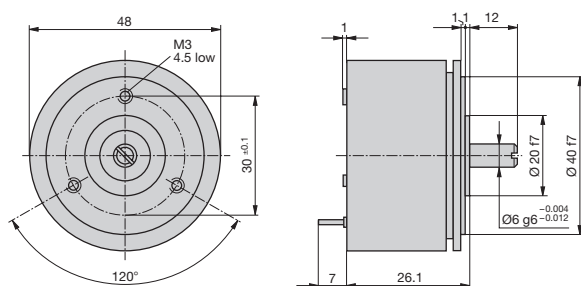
KINAX 3W2 with special drive shaft at front only, \varnothing 6 mm, length 12 mm.
